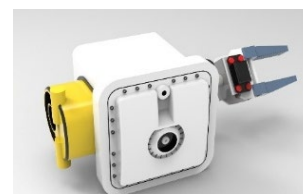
Mast, sherloc and Parallel Gripper Assembly
